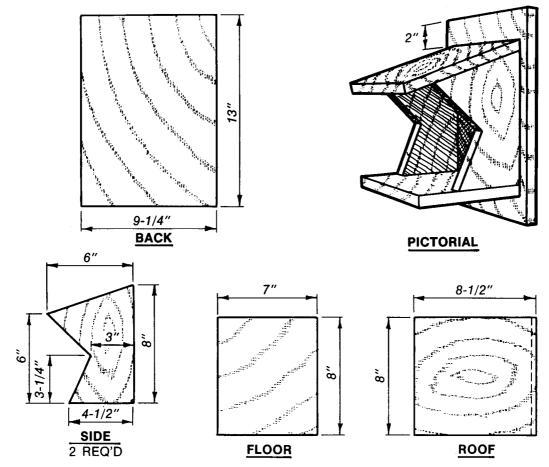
Construction details for a nesting shelf (after Henderson 1984)
